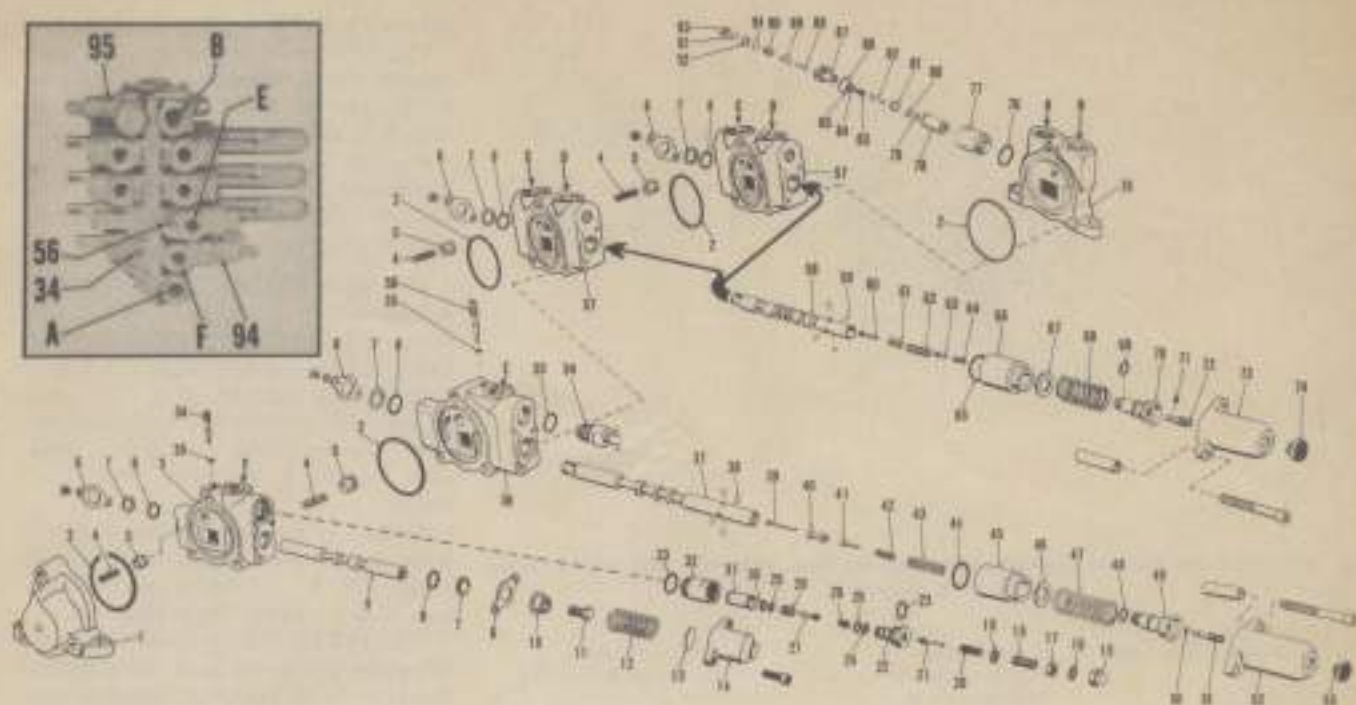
Exploded view of "Traction Booster" and hydraulic power lift valves used on Series IV D-17 tractors. Later production units may have outlet part (A) in the outlet housing (1) as shown at inset.
